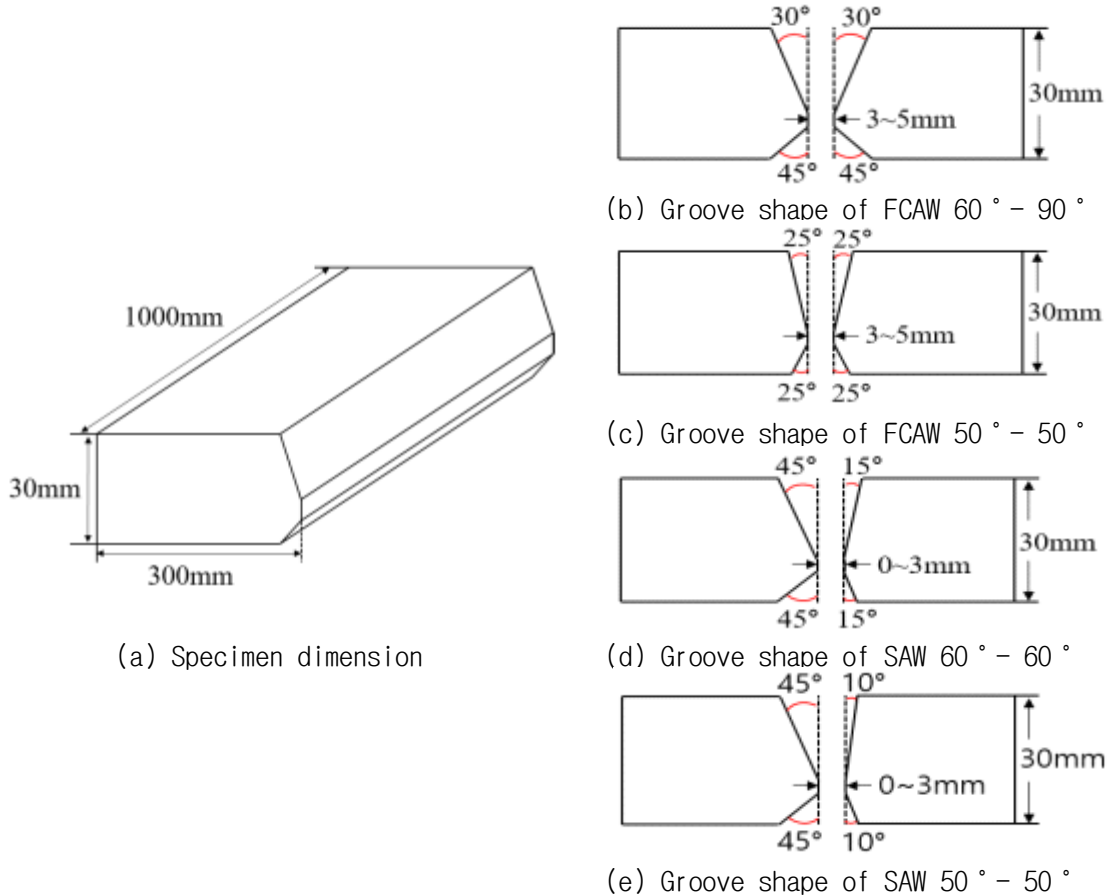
Specimen dimension and groove shape of FCAW, and SAW weld joints.
